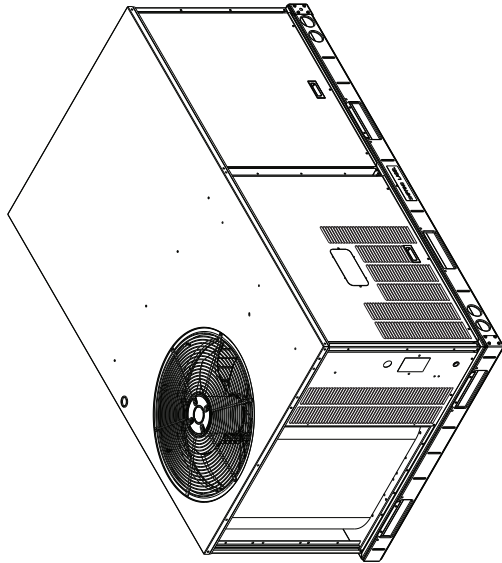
50GCO* 04-06 Base Unit Dimensions (cont)
